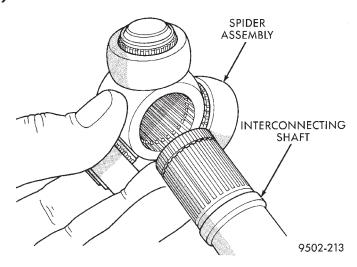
Spider Assembly Installation on Interconnecting Shaft
